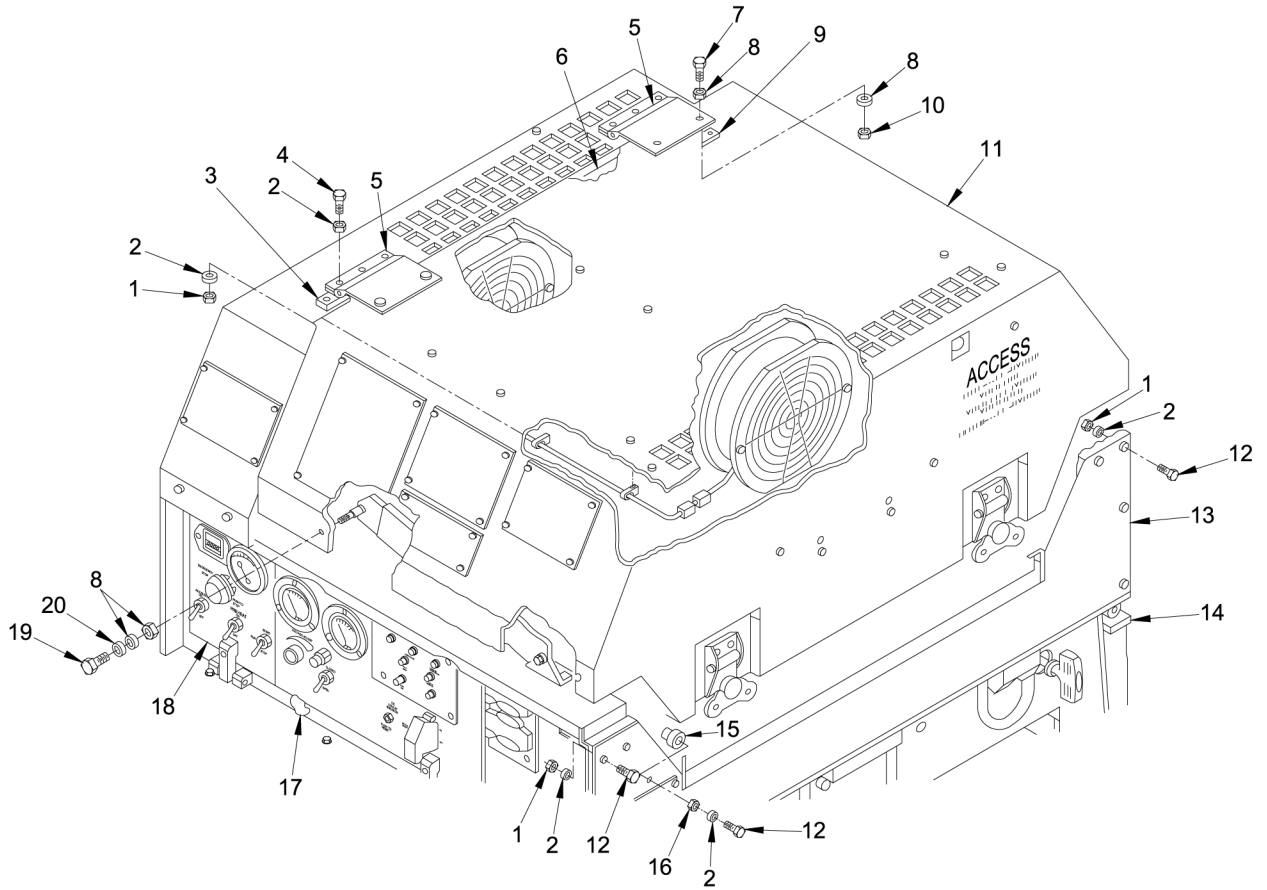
Frame and Housing Assembly/Main Access Cover (Sheet 1 of 4).
